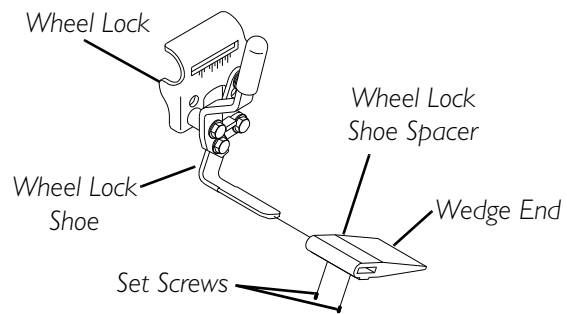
ADJUSTING WHEEL LOCKS
